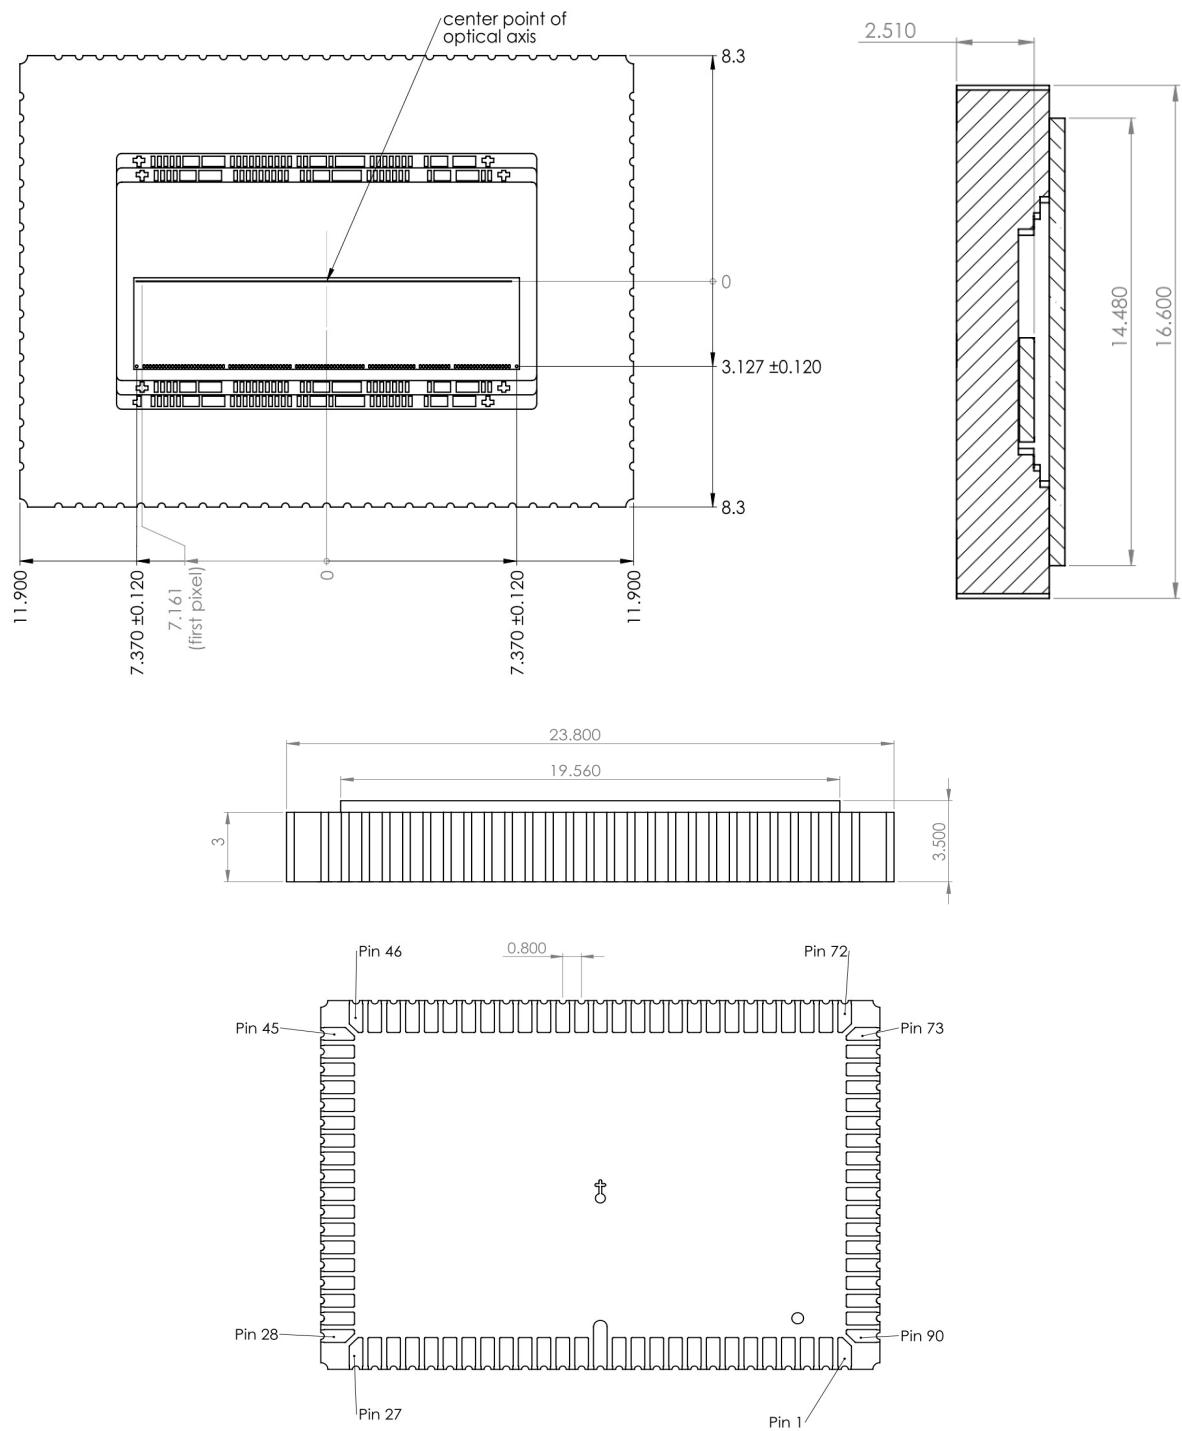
Four Views of LCC Package Drawings for DR2k-7
